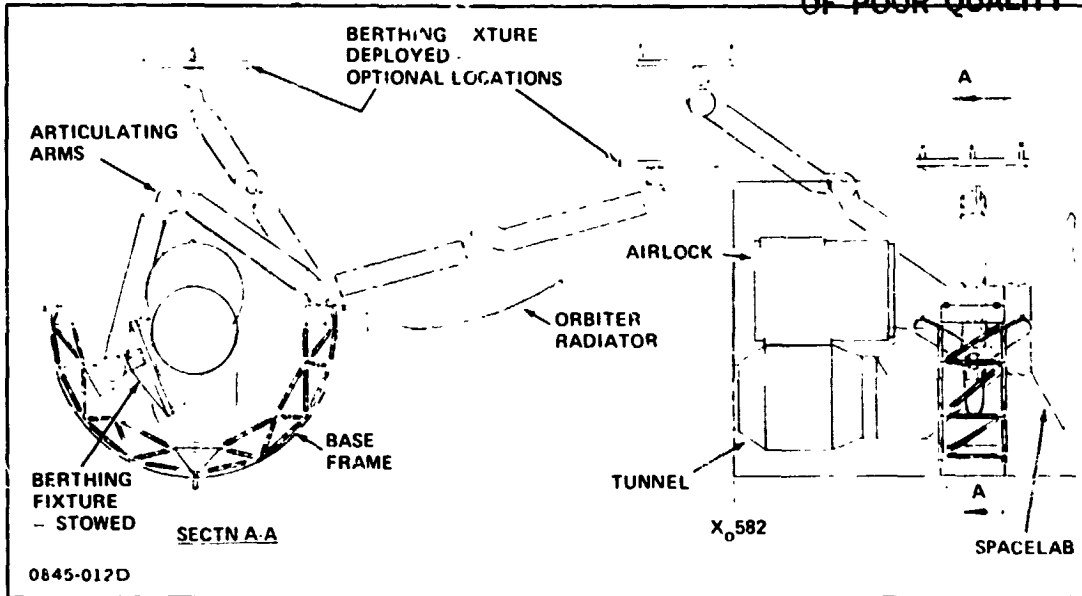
Bay Packing of HPA for 25 kW Power Module Support
